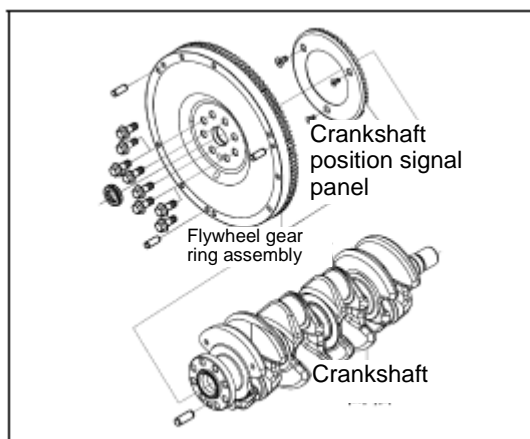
Removing the crankshaft and the crankshaft position signal panel
